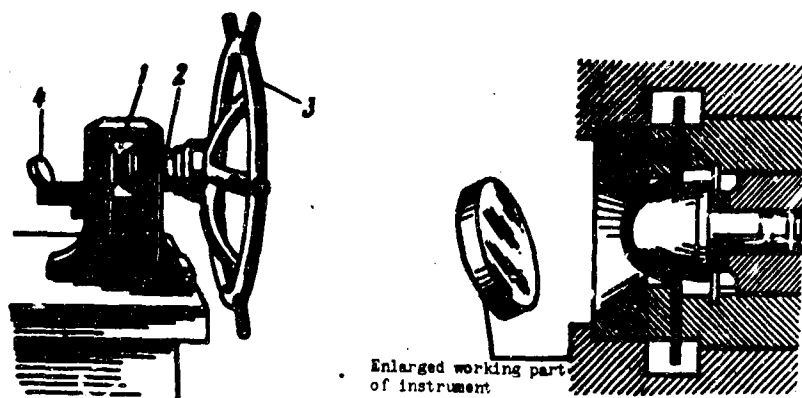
Extrusion test of material. 1 - slot; 2 - screw; 3 - wheel, 4 - mirror.
